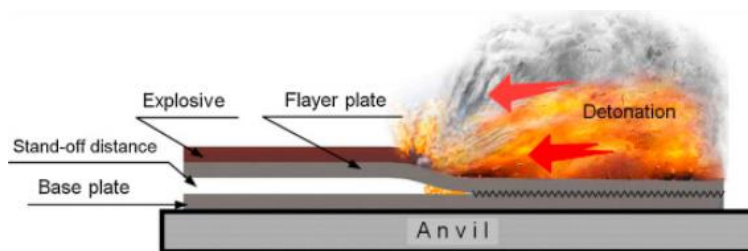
Sketch of the explosive welding technique for the bimetallic box manufacturing [33].
